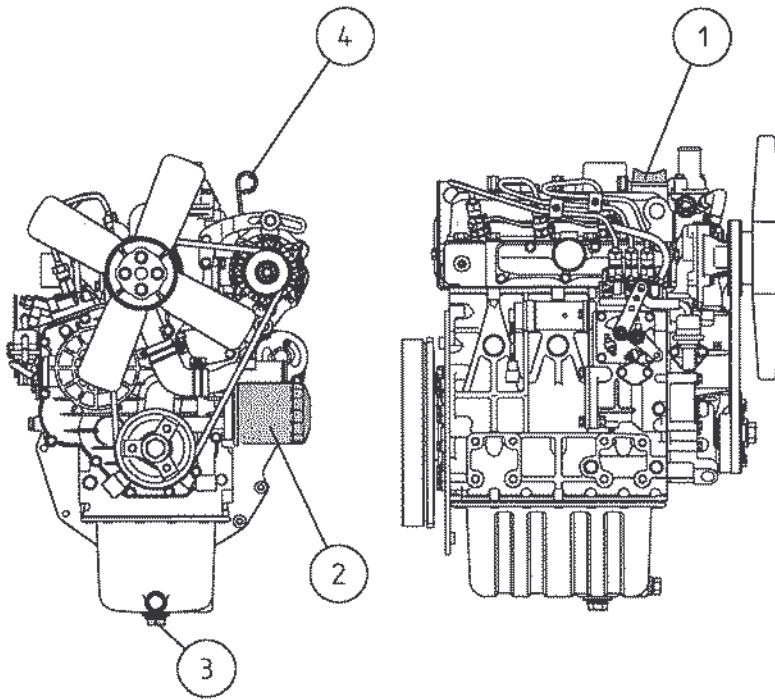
Changing oil and oil filter of Kubota D905-E motor
